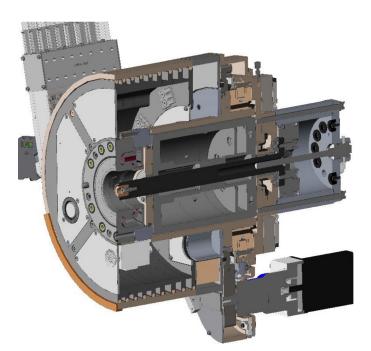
Spinner cutaway with rotor/stator configuration shown.
